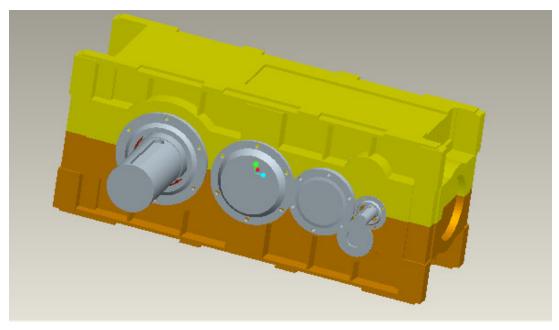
FRONT VIEW OF ASSEMBLY WITH INTERNALS
